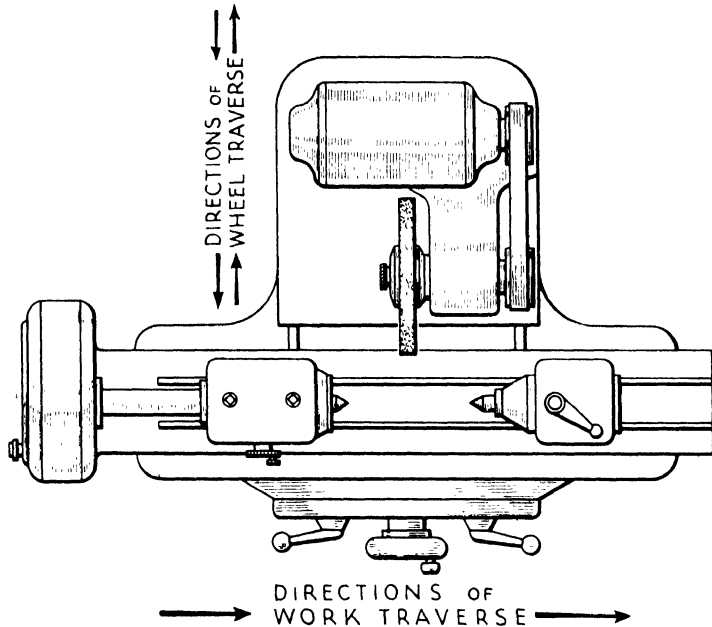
PRINCIPAL MOVEMENTS ON A SIMPLE THREAD-GRINDING MACHINE
